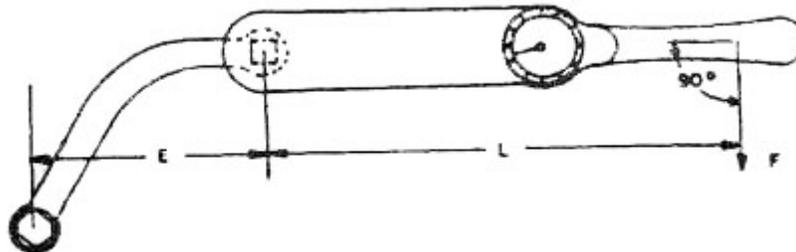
Adaptor Attached to Handle End of a Box End Wrench
